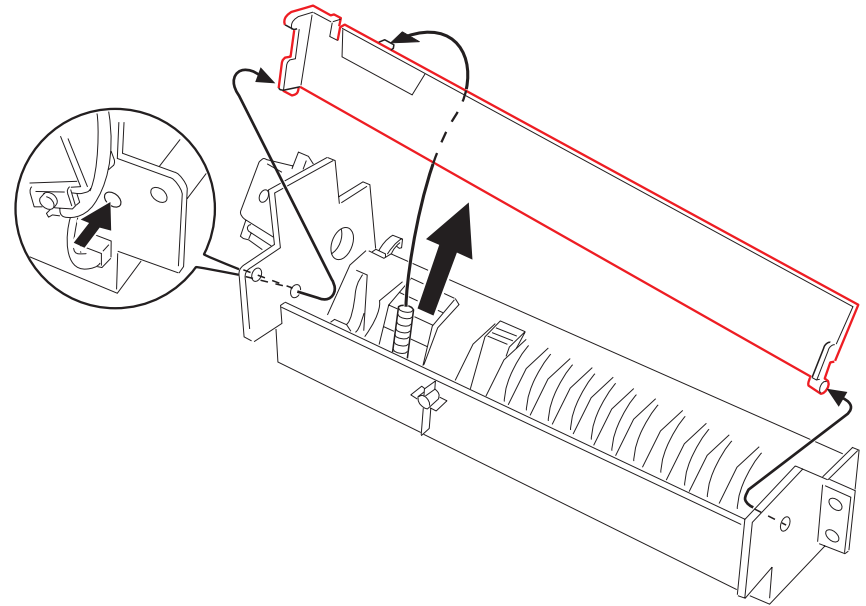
“Platen Assembly Bottom MBF” Removal
